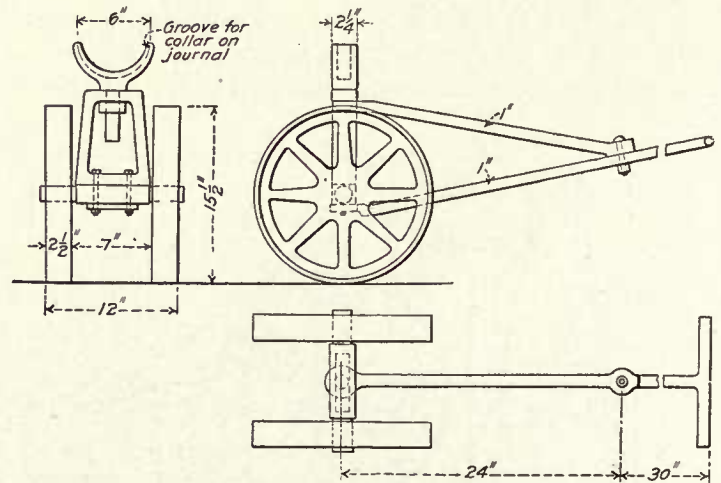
Transfer Carriage for Mounted Car Wheels.
